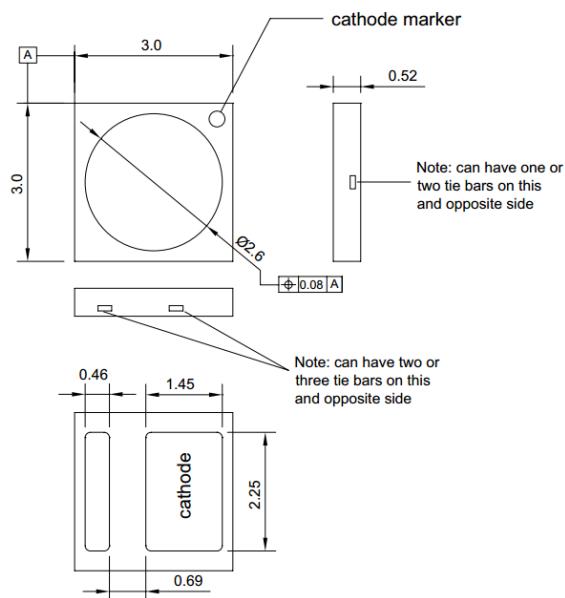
Mechanical Drawing for LUXEON 3030 2D. All dimensions are in millimeters.
